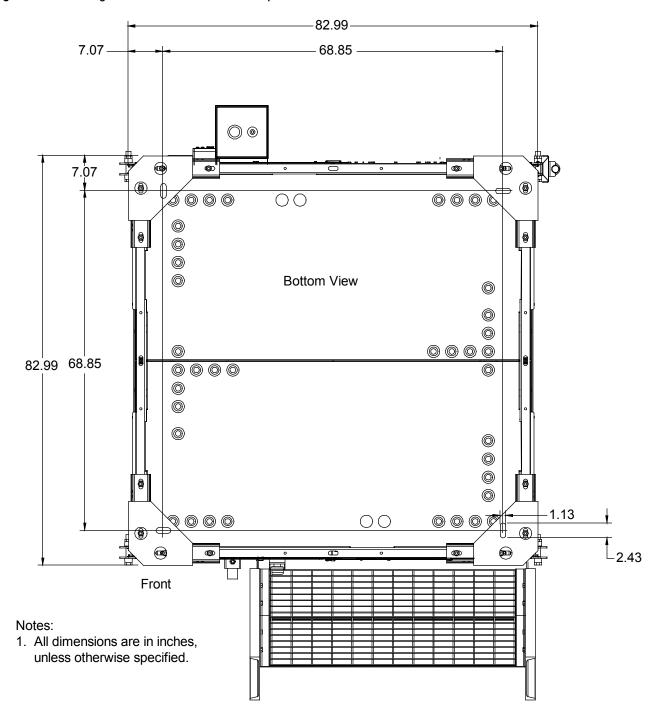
Mounting Hole Dimensions (with corner plates)
